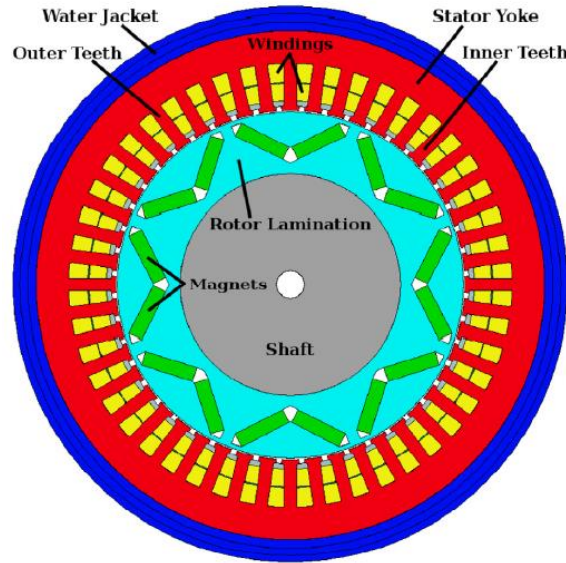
7. Radial schematic view of the electric machine and the cooling jacket [54].
